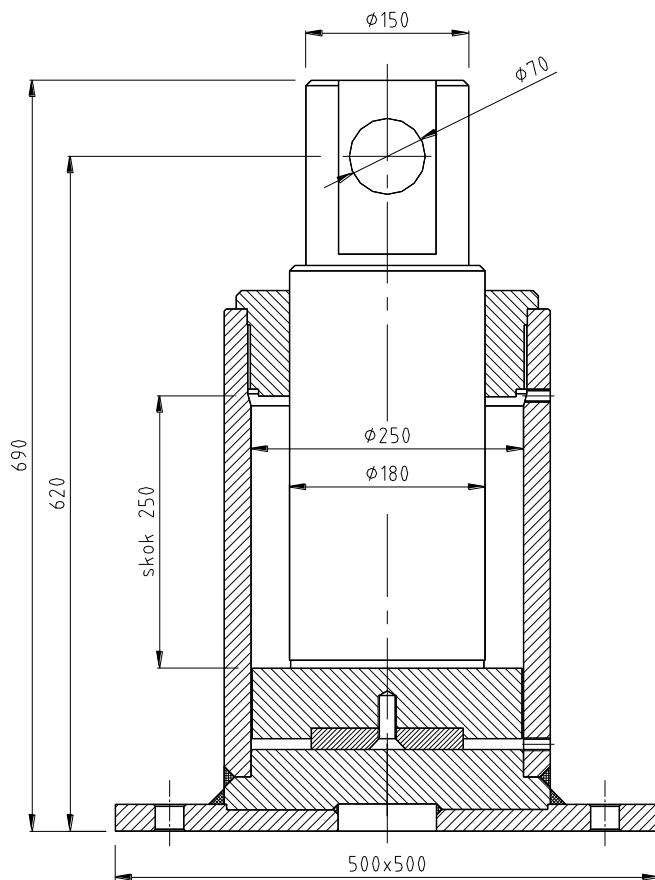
Modular hydraulic cylinder with GIKFR end.
